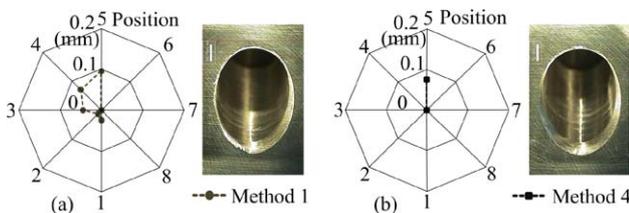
Burr size after deburring with tool 2 at a spindle speed of 700 rpm, a feed rate of 28 mm/min, an inclination angle of 30°, and with coolant using (a) deburring Method 1 and (b) deburring Method 4.
